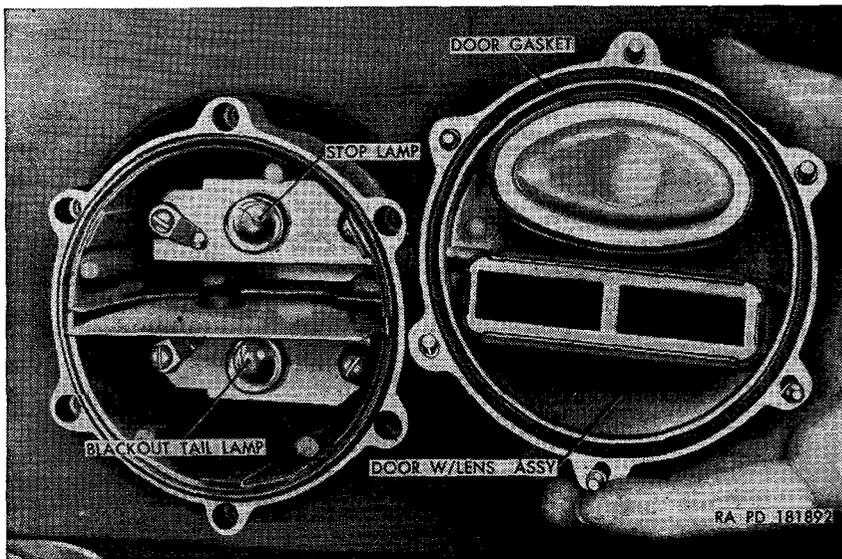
Blackout tail and stop light assembly—installed—door removed.
